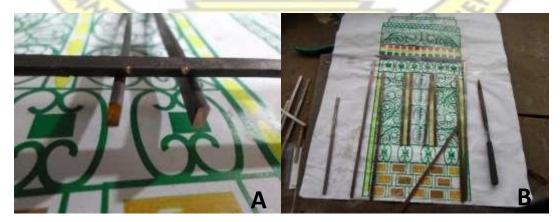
A and B: Marking and cutting of rectangular rods for building the frame
